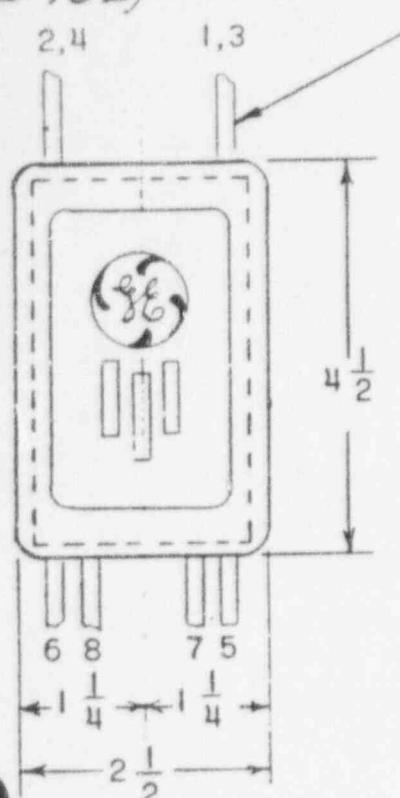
(06077058-019) Outline and Panel Drilling for Surface Mounting of HGA17A and HGA17H Relays
